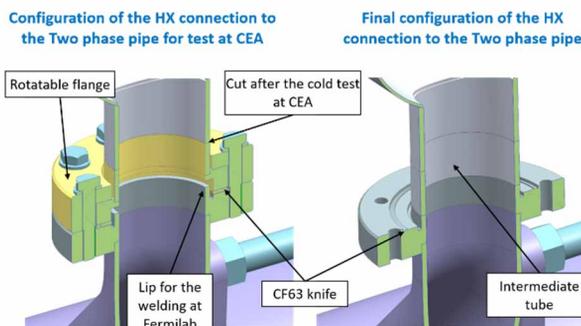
Specific flange for bolted connection – cold test configuration at CEA, right - and welded assembly – final configuration at Fermilab.
